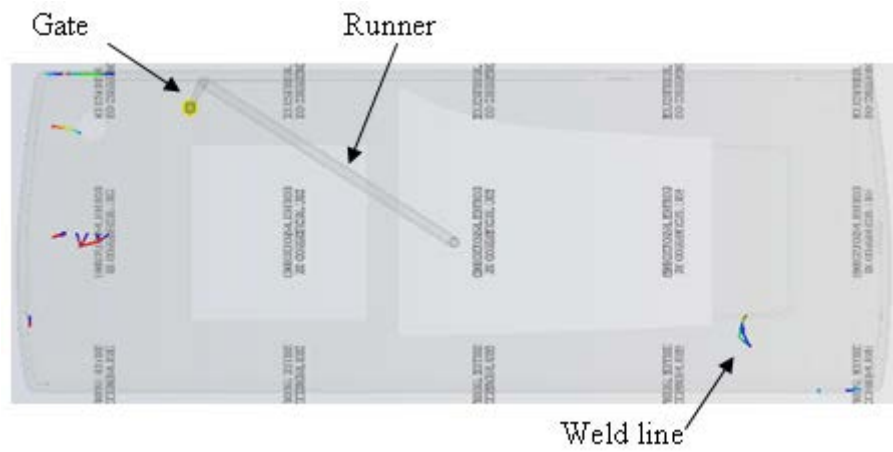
Weld lines produced at the injection pressure of 240 MPa
